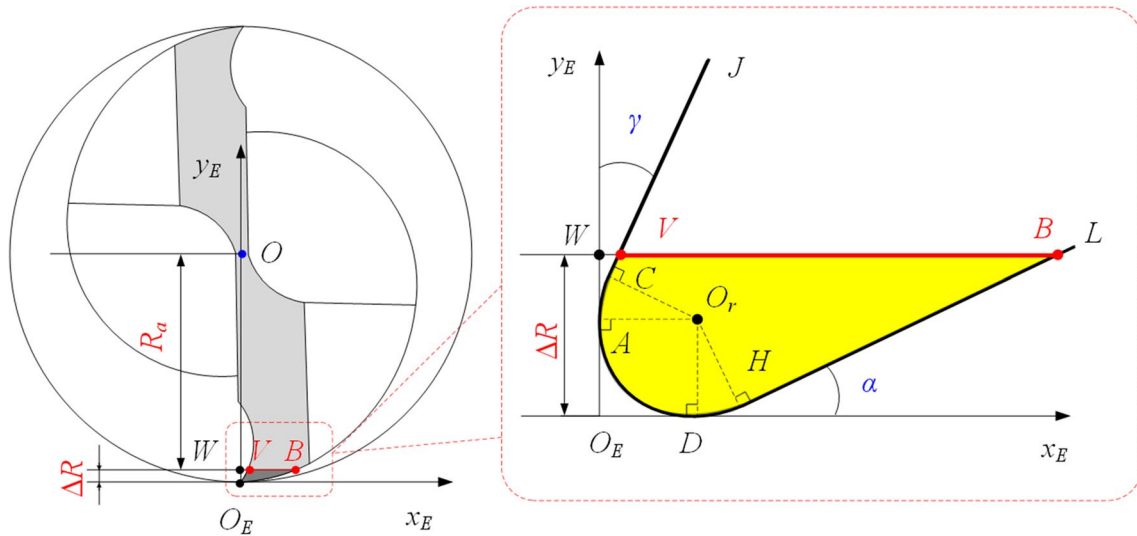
The relationship among the actual radius of the tool, tool flank wear, and tool edge radius
